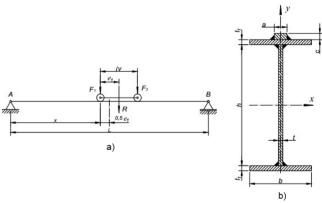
a) Schematic diagram of the bridge crane; b) Girder cross section
